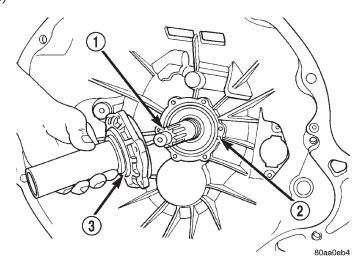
Installing Input Shaft Bearing Retainer— Typical
